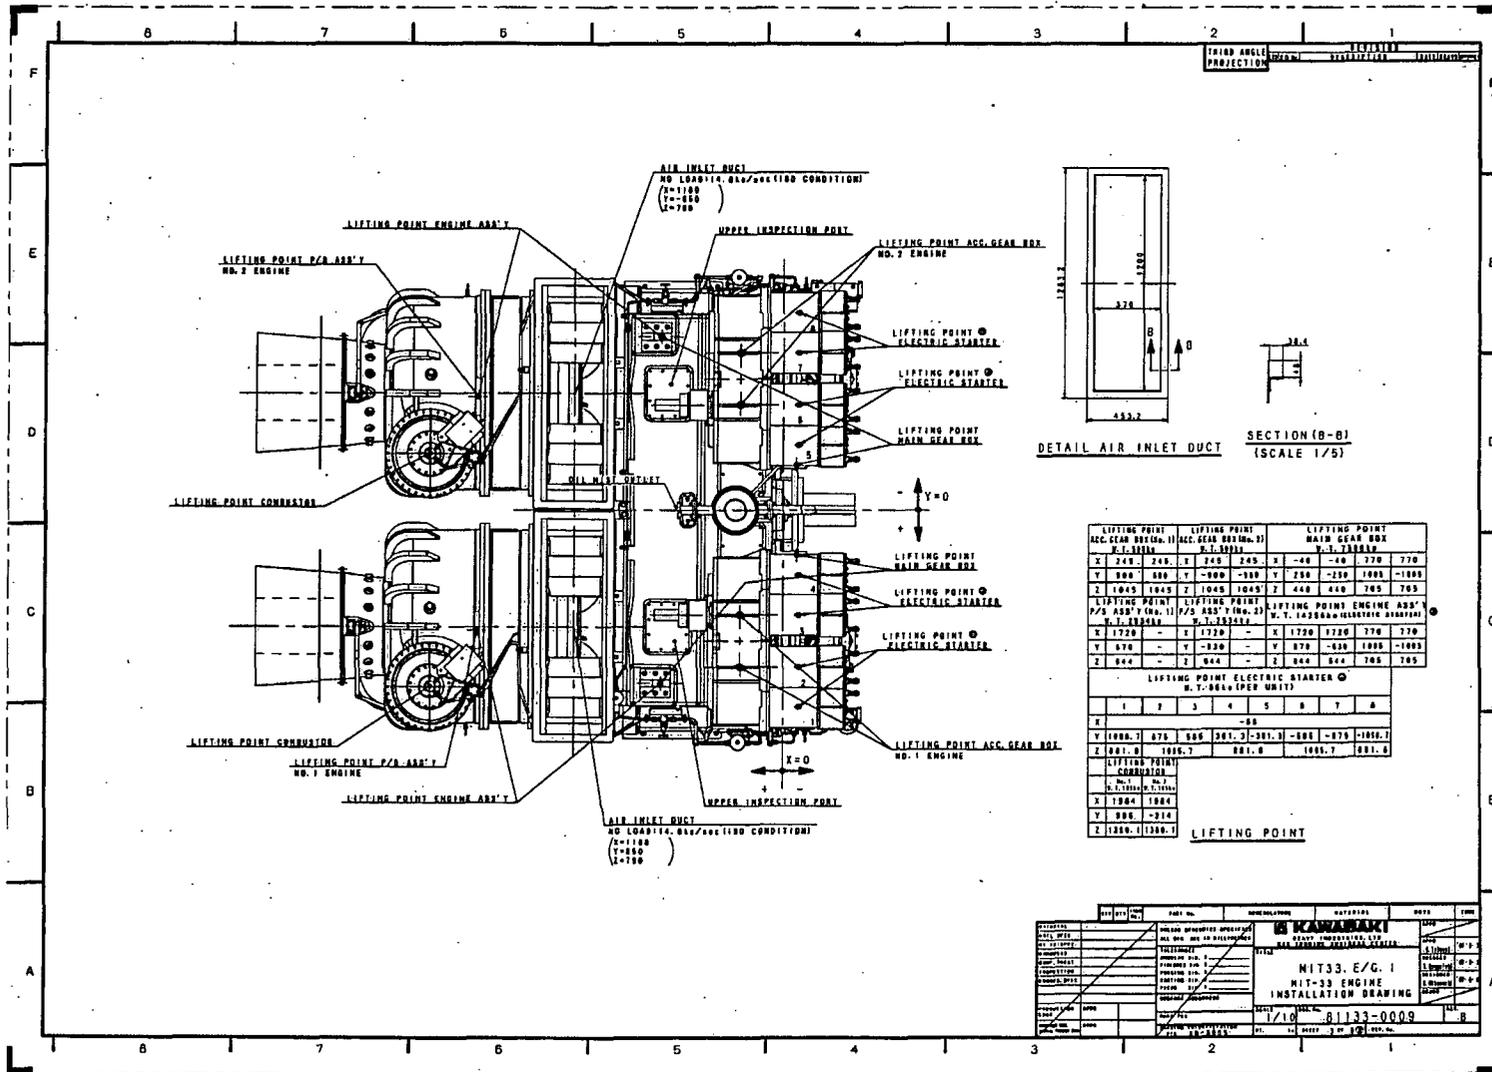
Installation Drawing of Gas Turbine Assembly (sheet 3)
